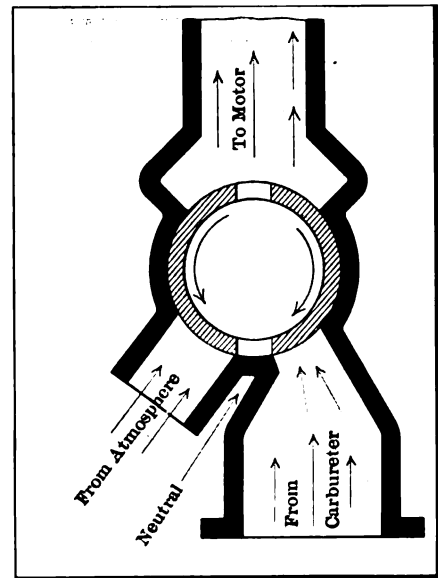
Valve in the manifold just above the carbureter, placed there to permit of using the motor to slide down hill without using the brakes on the car
